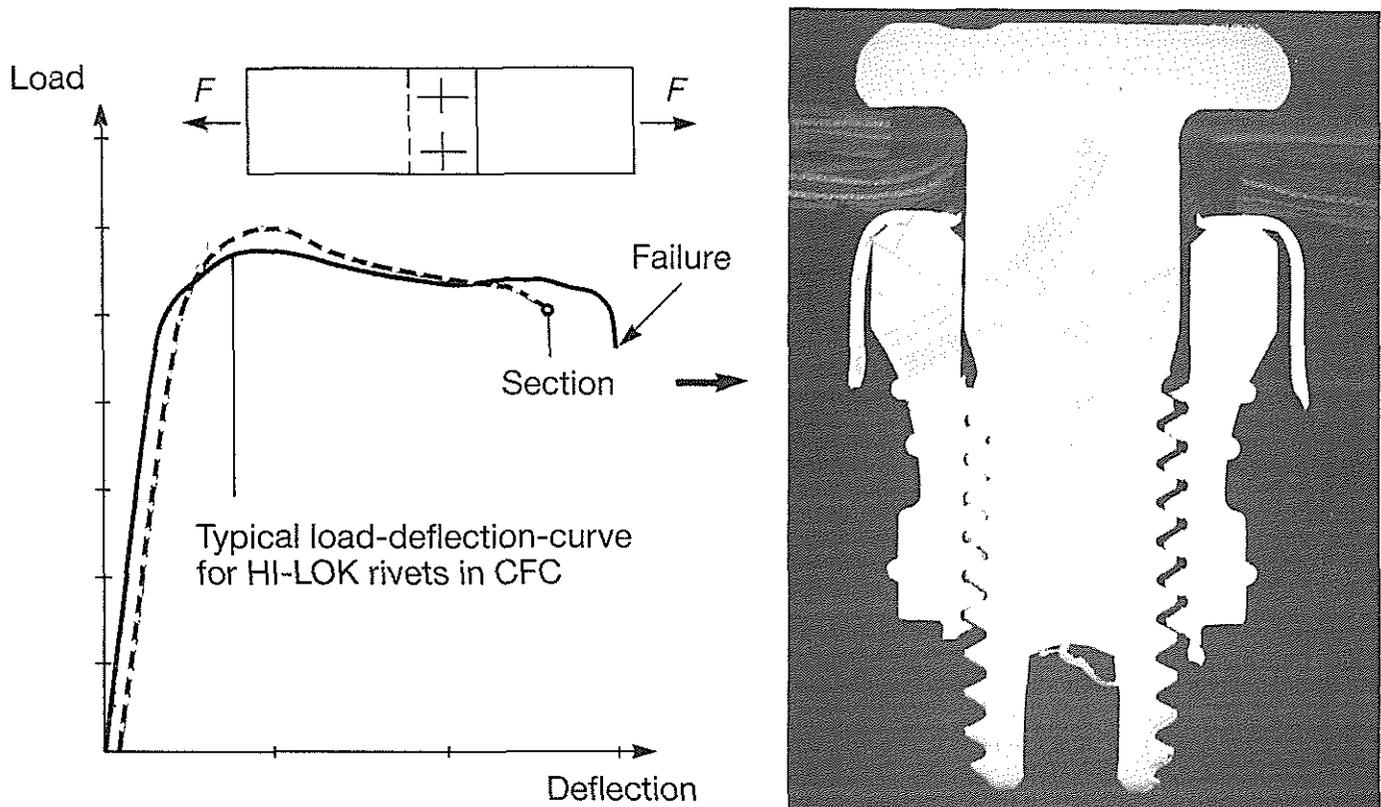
Bearing failure (HI-LOK rivet in CFC)
